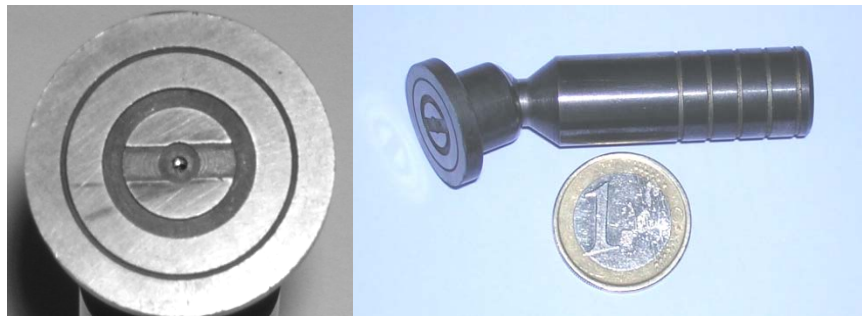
Slipper top view and Piston-slipper assembly.
